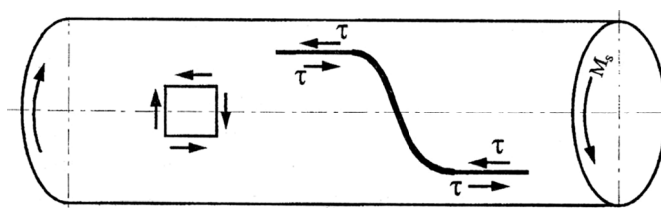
The scheme of surface lamination forming during wire twisting [8]
